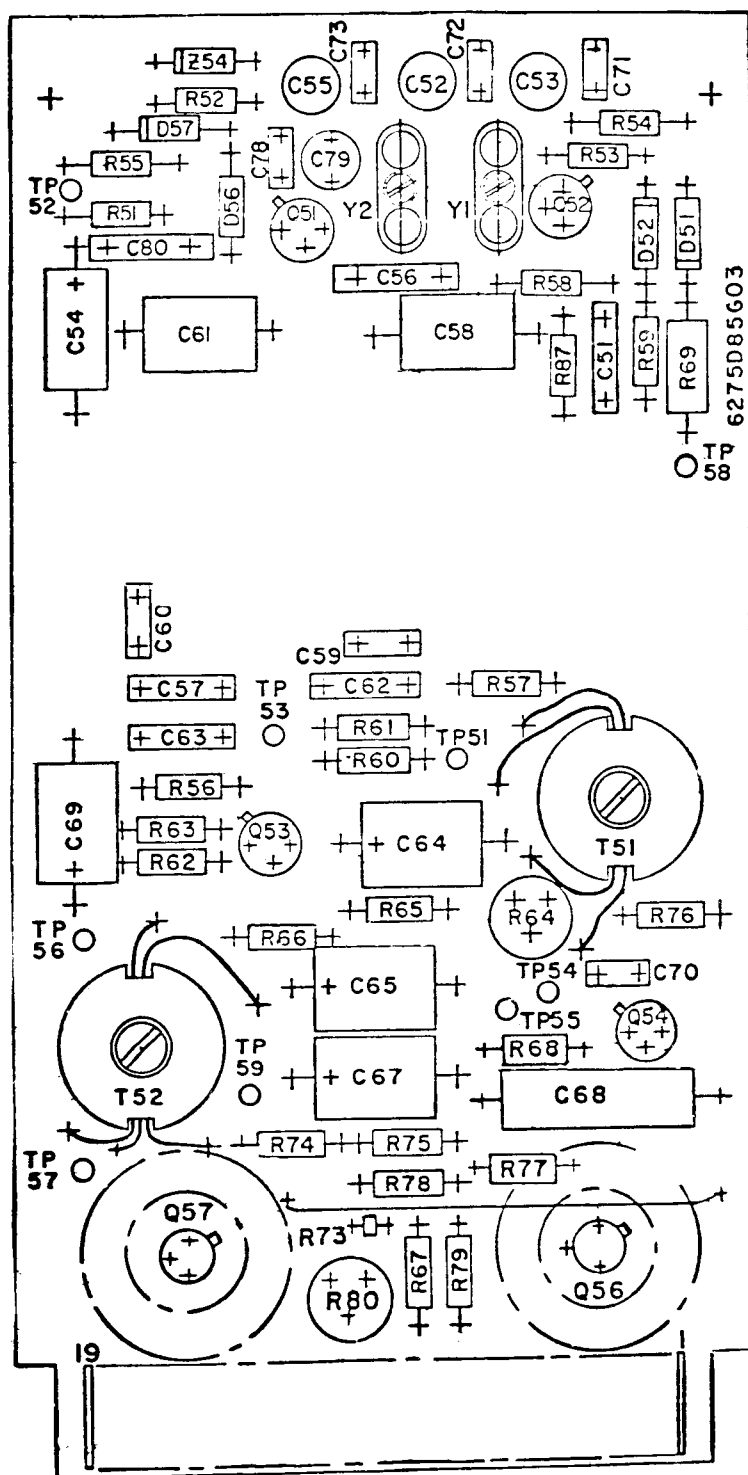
Component Locations of the Type TCF Transmitter Assembly
